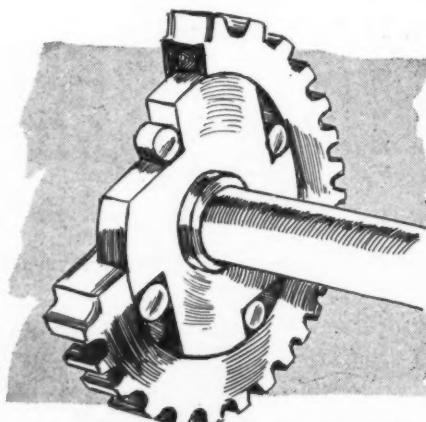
Cutaway view of overrunning clutch of the type used in the gear of electric starters to prevent the engine back-driving the motor should the latter not be switched off immediately firing commences
